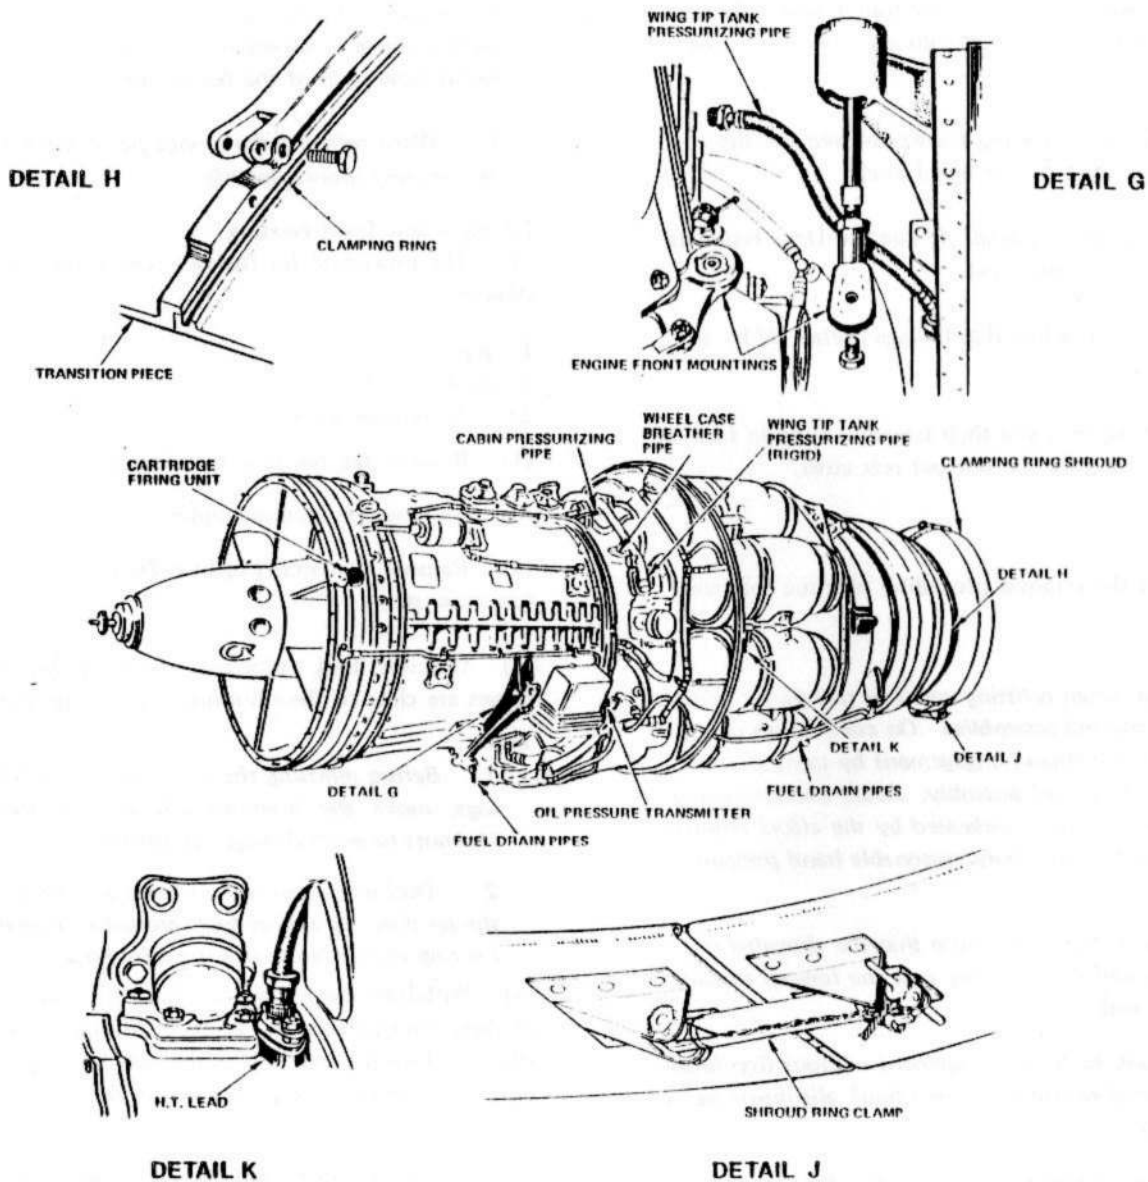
ENGINE CHANGE UNIT REMOVAL (2)
